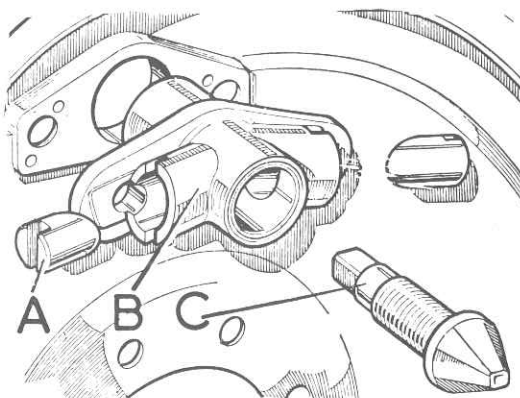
Rear wheel brake adjuster (Series II, LWB)
